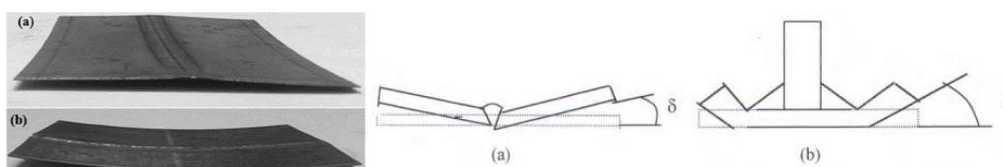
Angular Deformation of (a) Butt Joint and (b) Fillet [6]
